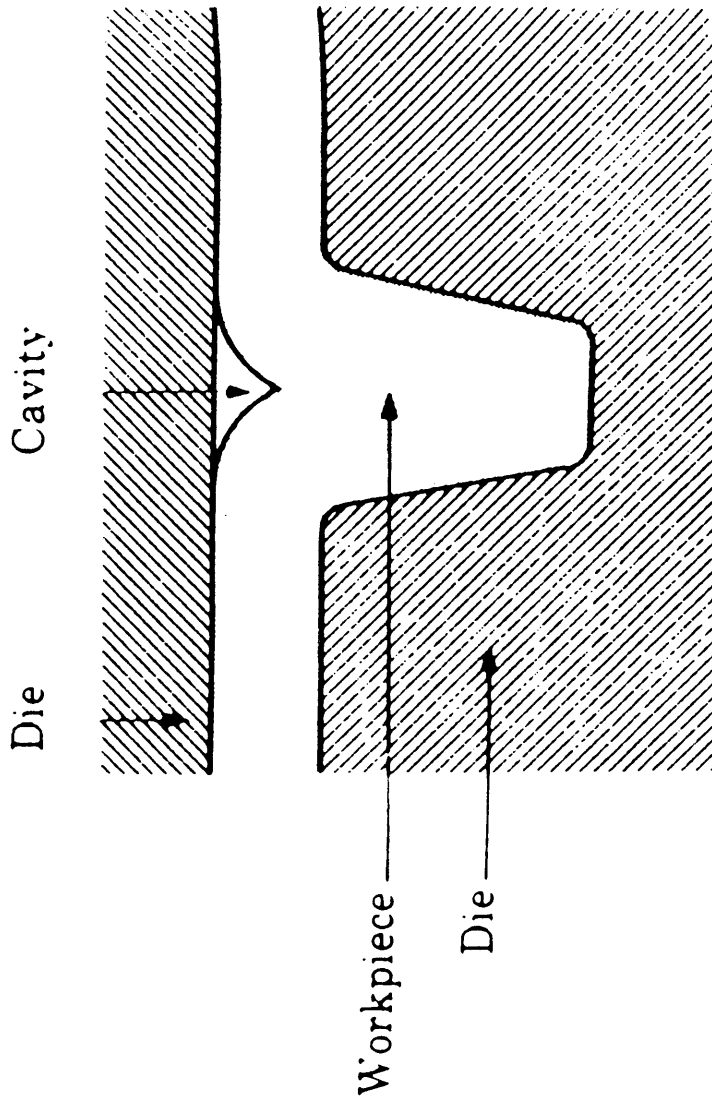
Defect in forging due to material flow pattern into the die cavity (11).
